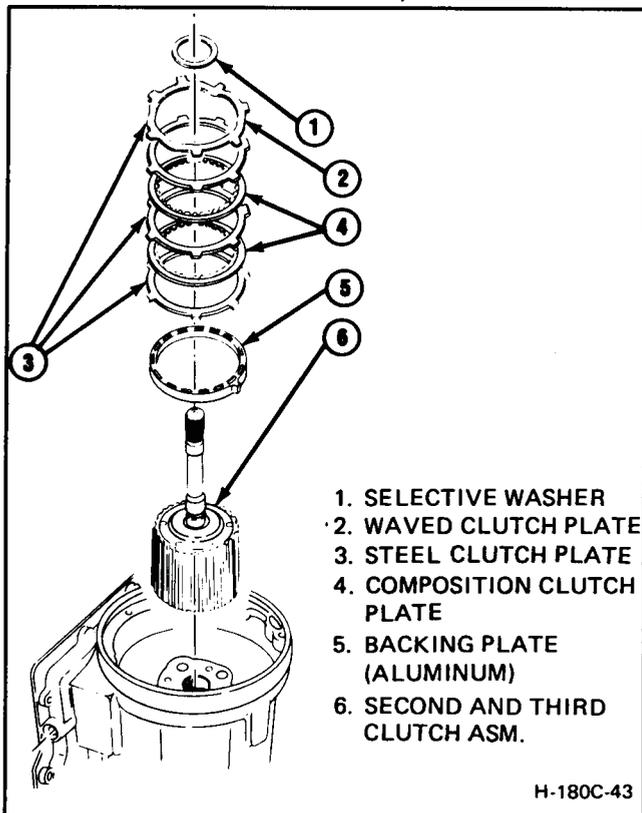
C-55 Installing Second/Third Clutch Assemblies Into Case
